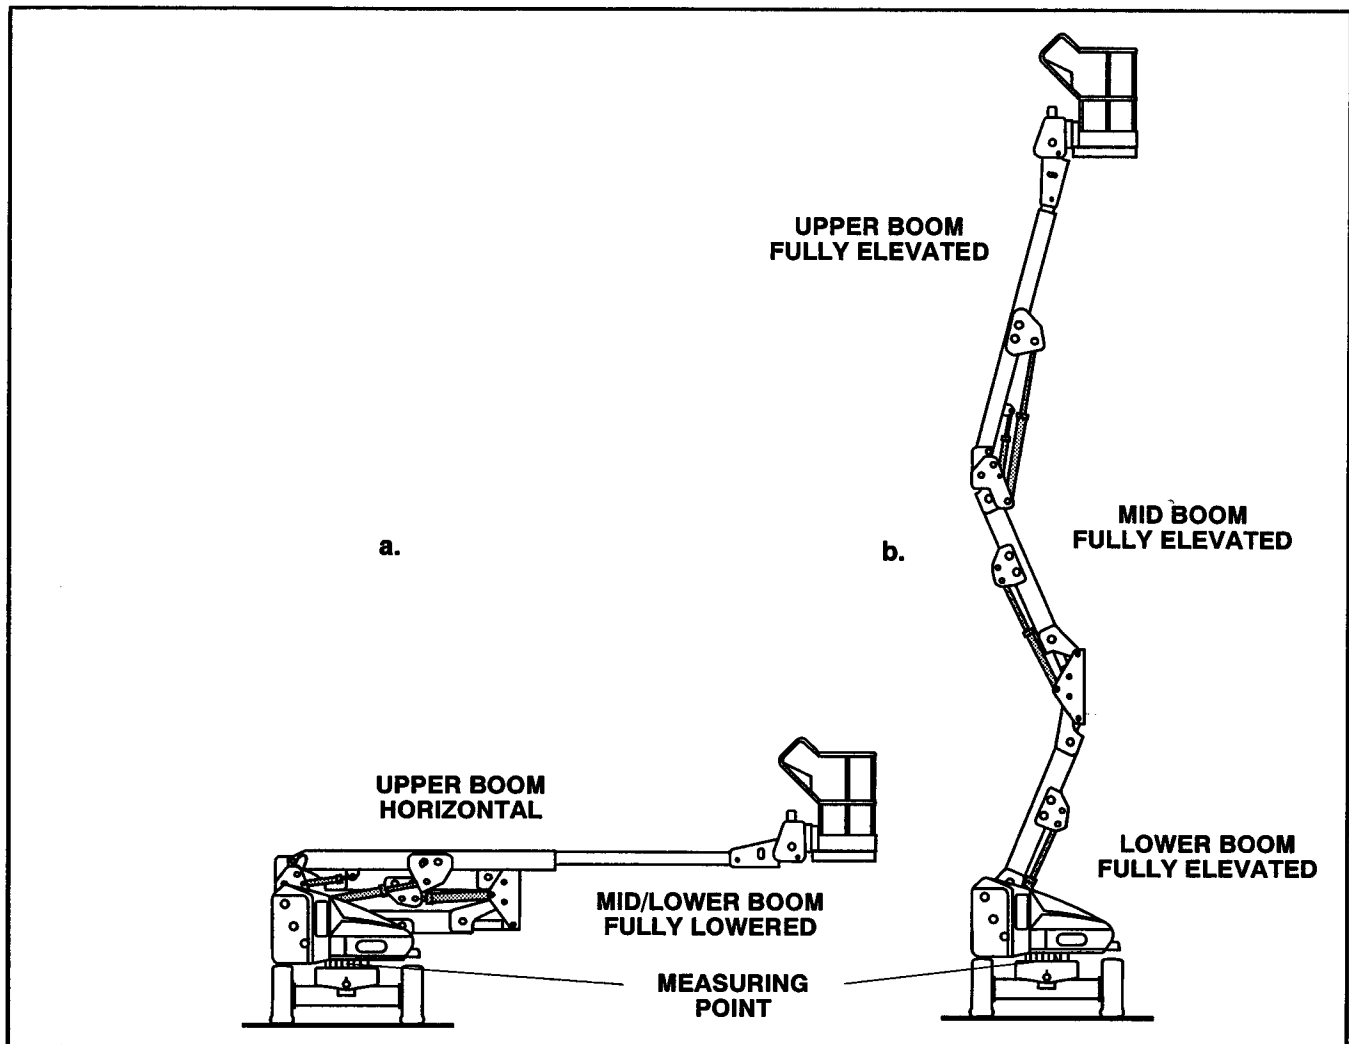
Swing Bearing Tolerance Boom Placement.
